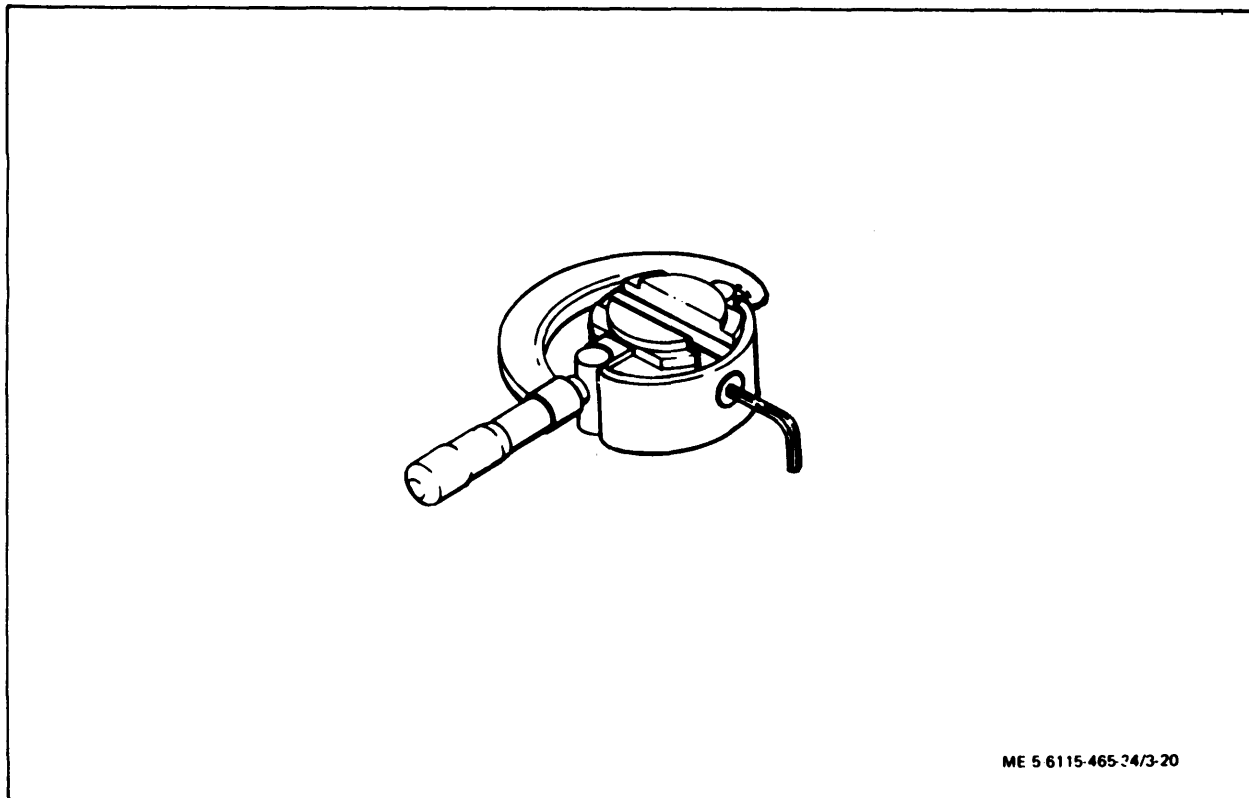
Adjusting Fuel Injection Pump Roller-to-Roller Dimension
